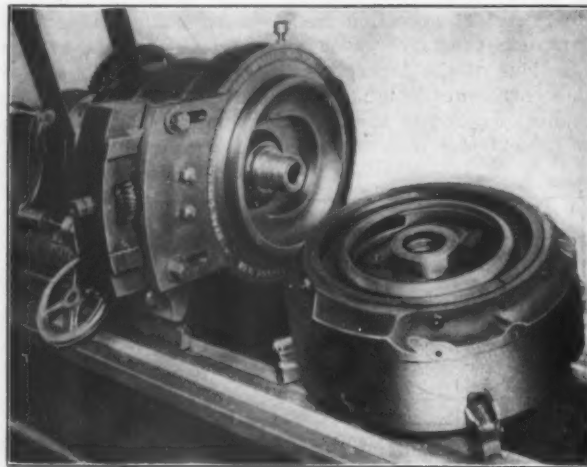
The Moller Oval Chuck Partly Unassembled.
